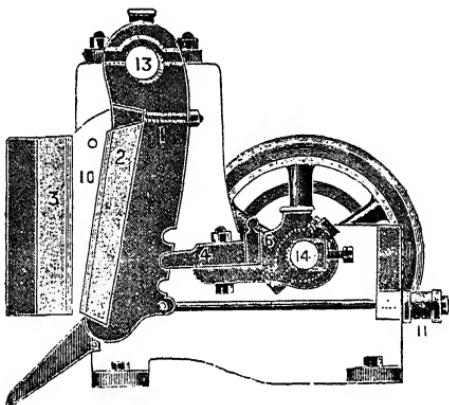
Simplex Combined Stone-Breaker, with Cracking Motion.
